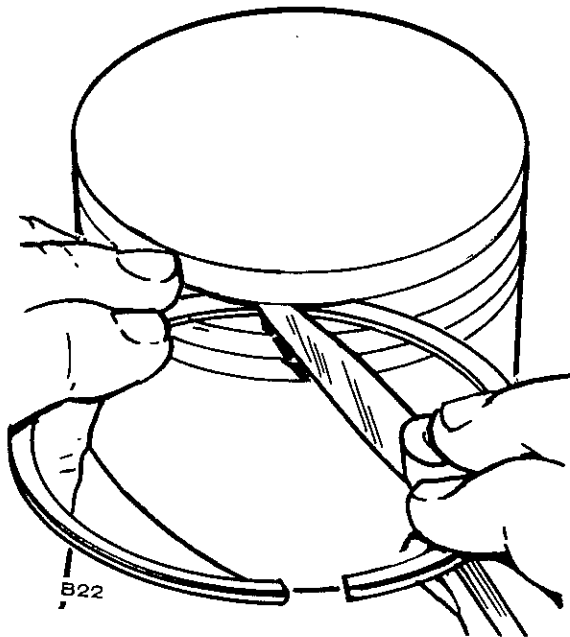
CHECKING RING SIDE CLEARANCE
